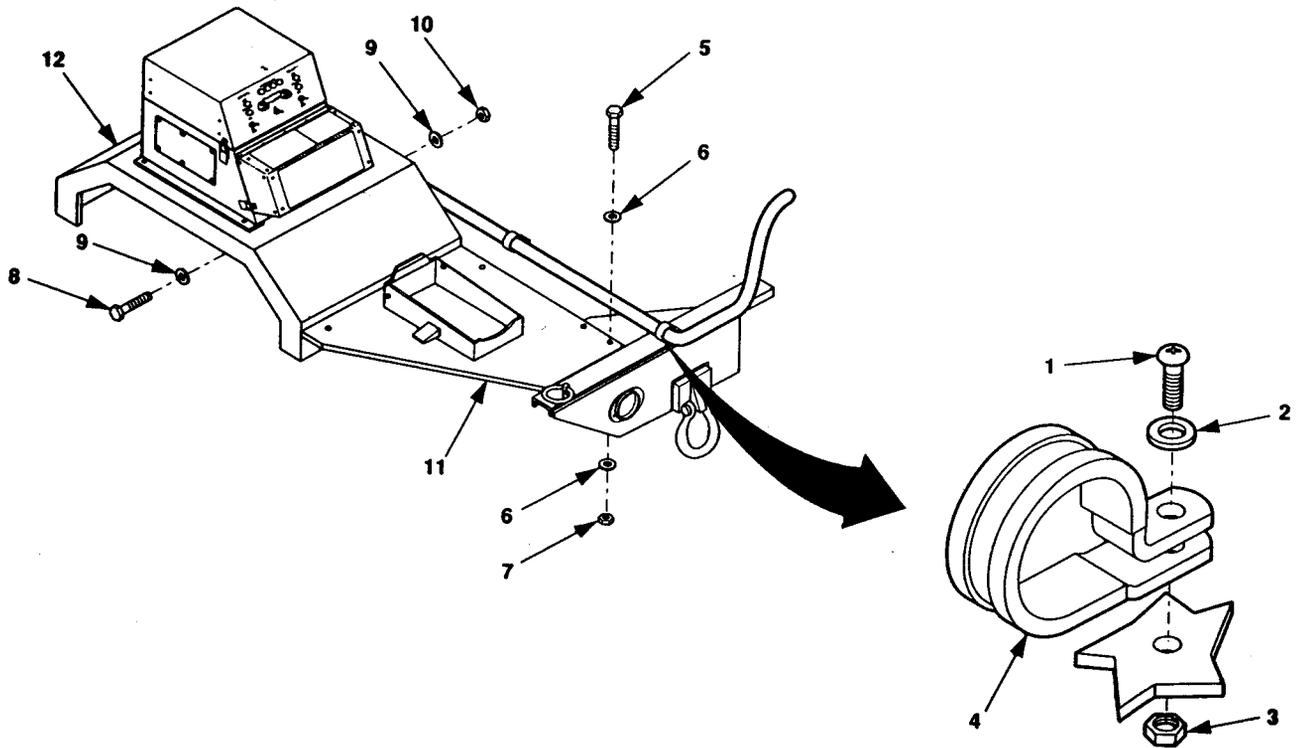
AN/MJQ-35 Roadside Fender Assembly Removal.
